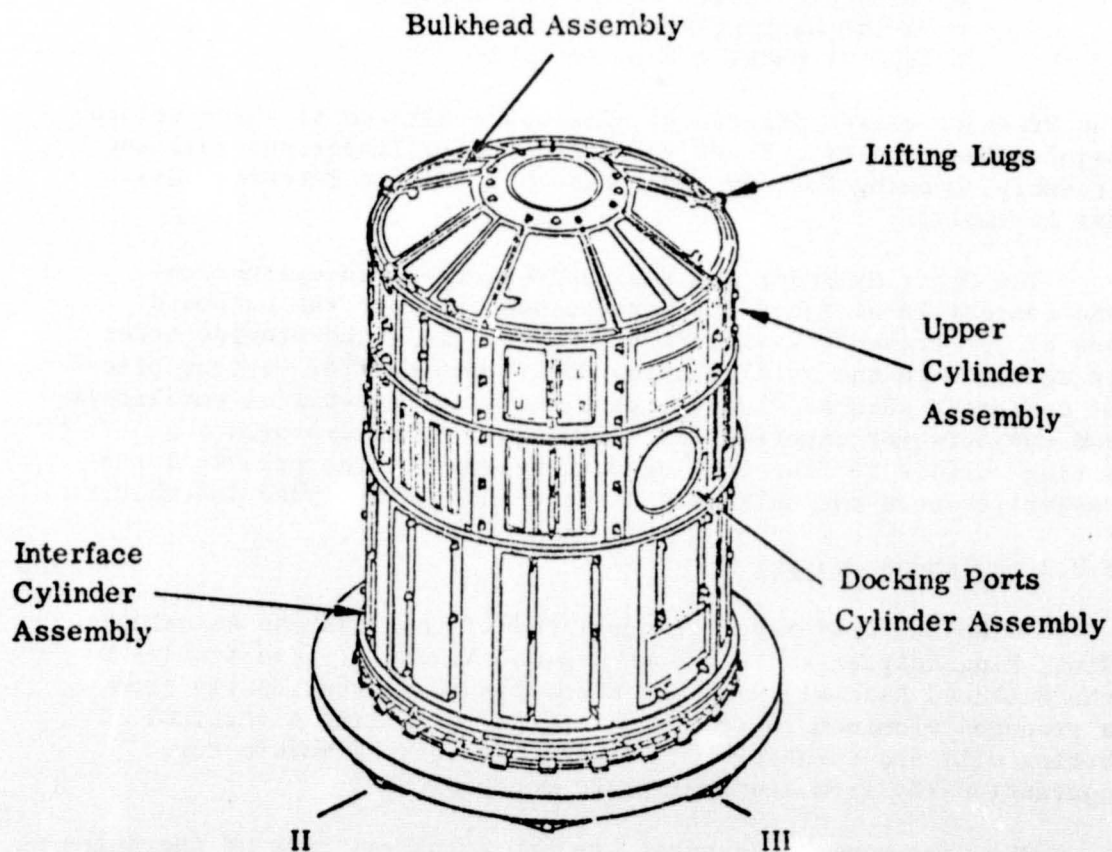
MDA Pressure Vessel Structure Assembly
